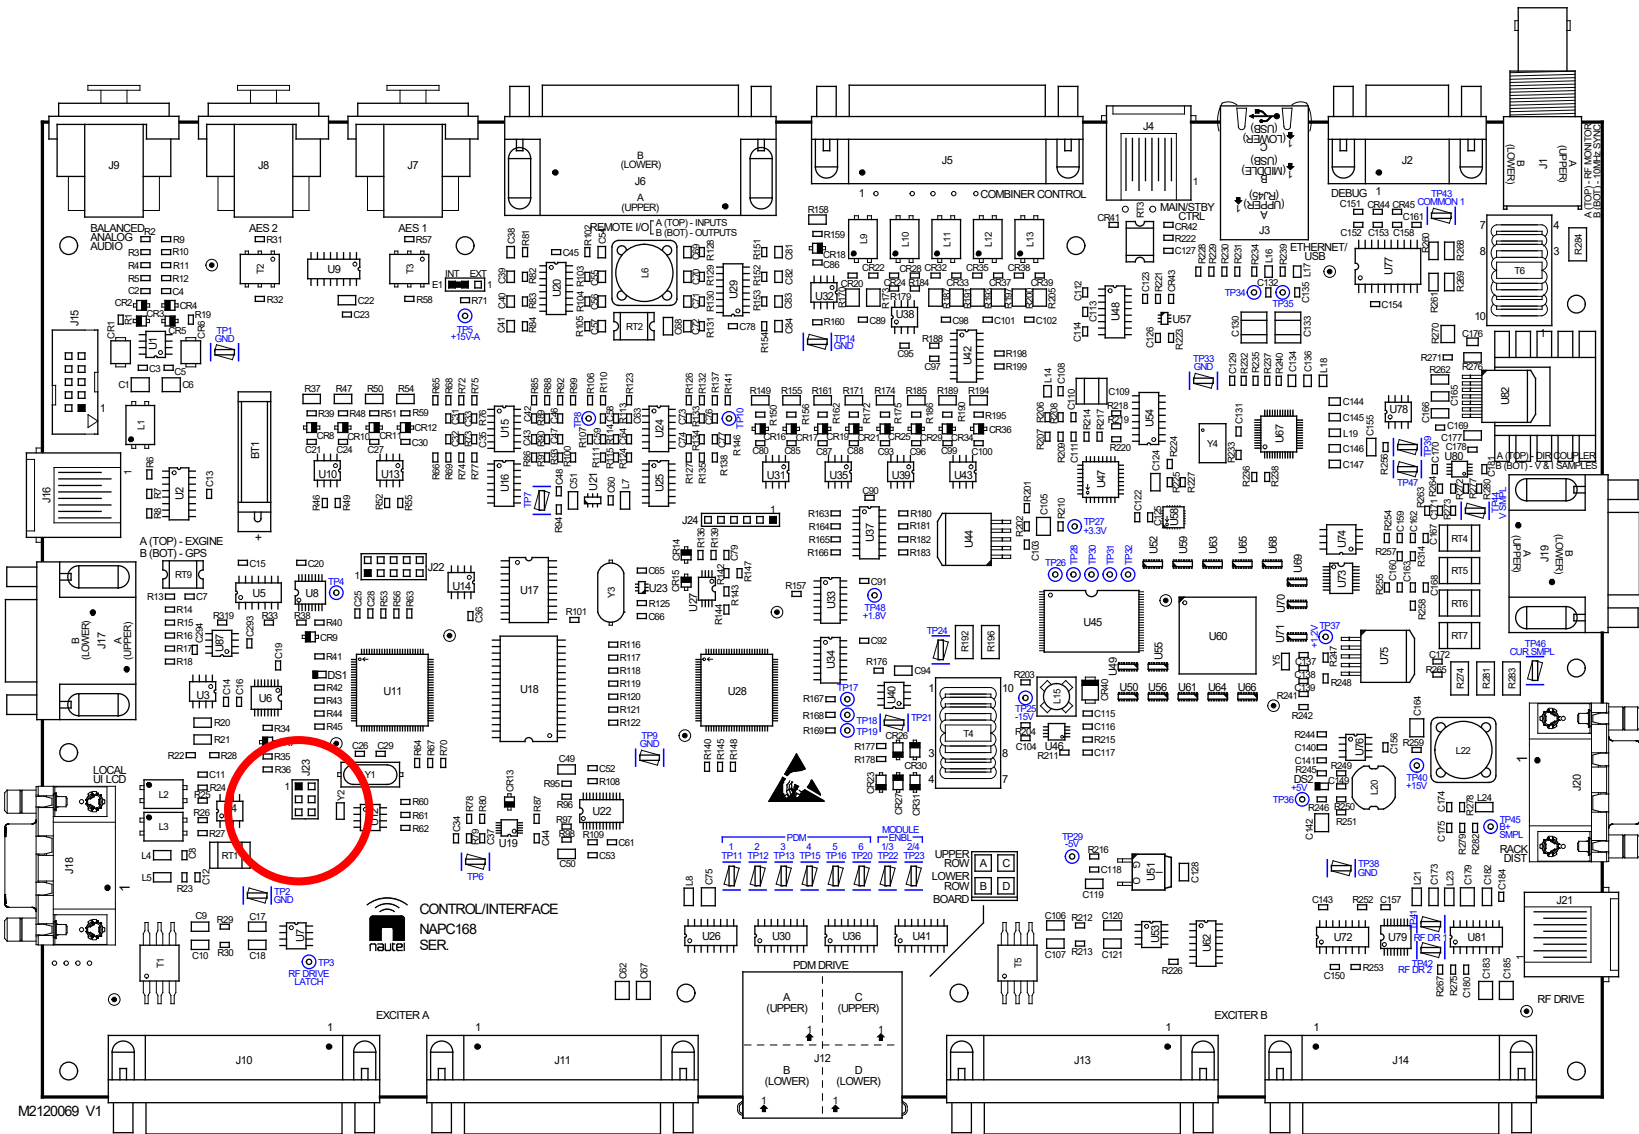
Assembly Detail - NAPC168\* Control/Interface PWB
